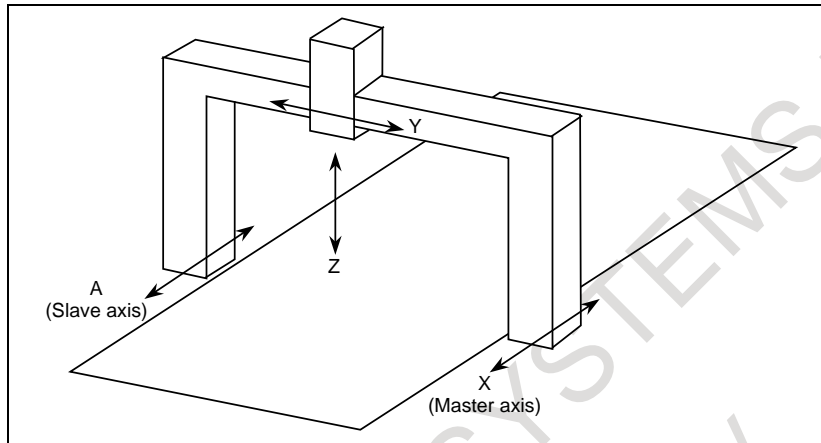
(a) Example of machine with X and A being synchronous axes
